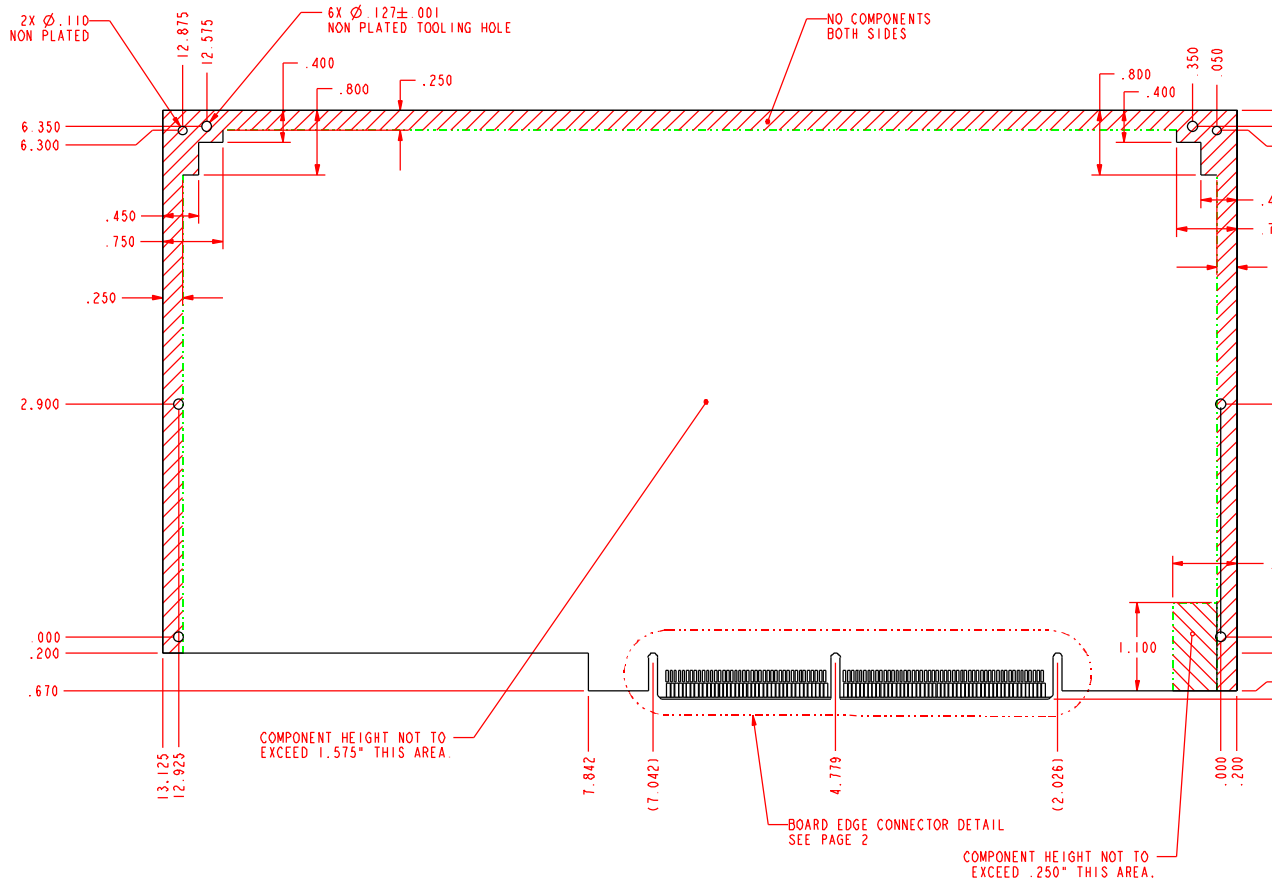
Pentium Pro 1MB Processor Module Mechanical Drawing
